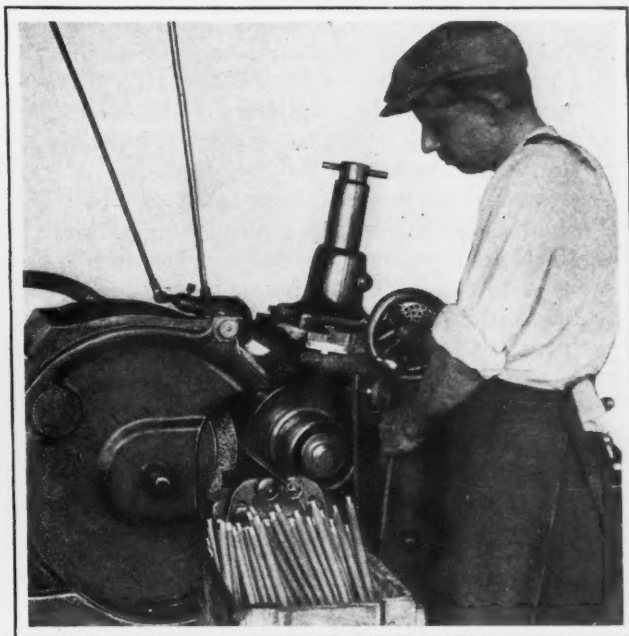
Grinding the Ends of Valve Push-rods by the "In Feed" Method on a Centerless Grinder
